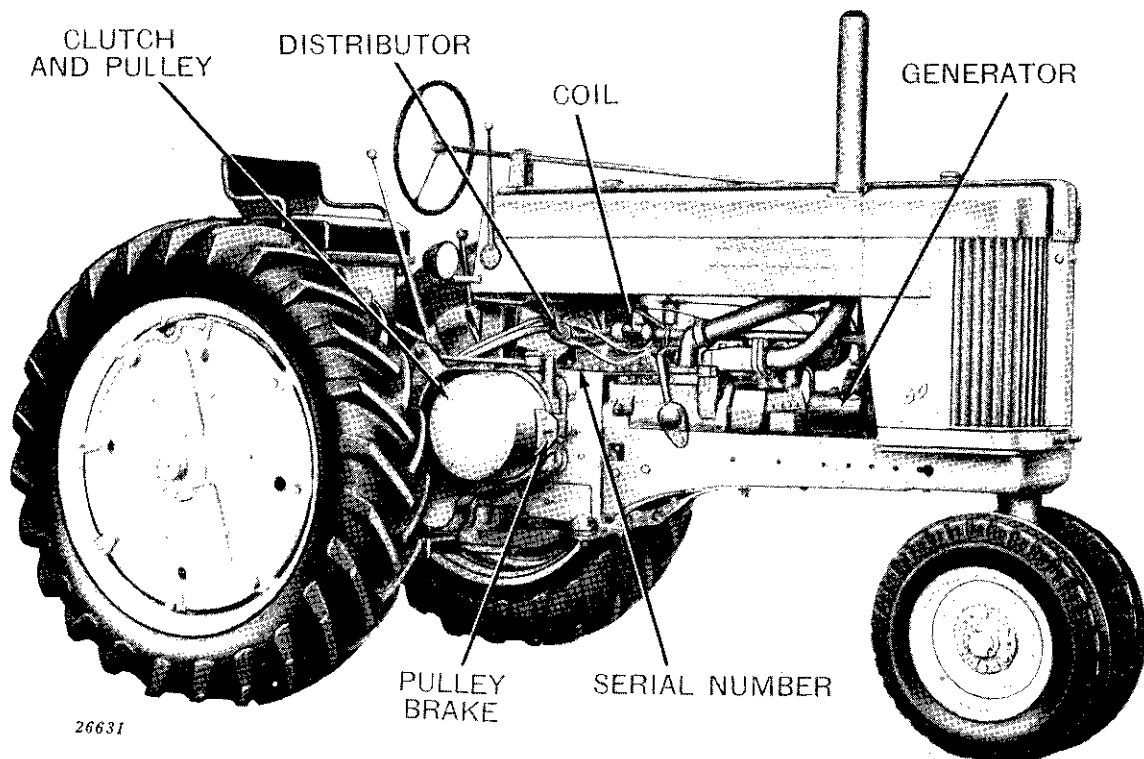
John Deere Model "60" Tractor—Pulley Side
